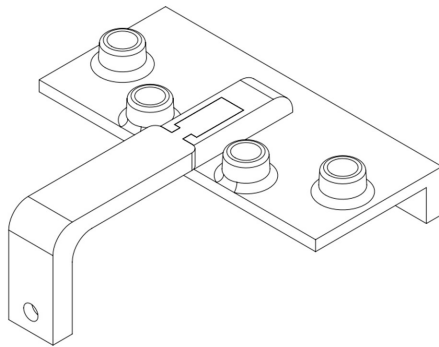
Isometric View of Assembled C-Clamp Arm to Base
